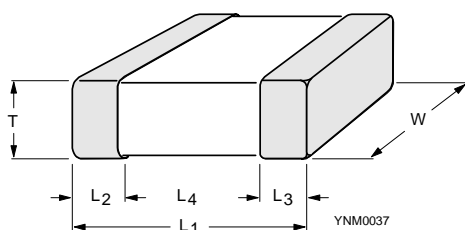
Surface mounted multilayer ceramic capacitor dimension
